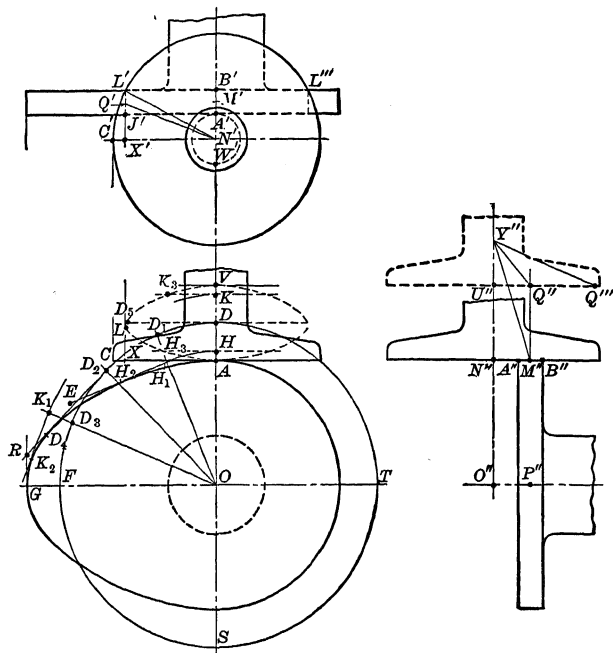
PROBLEM 7, CAM WITH FLAT SURFACE FOLLOWER—MUSHROOM CAM
